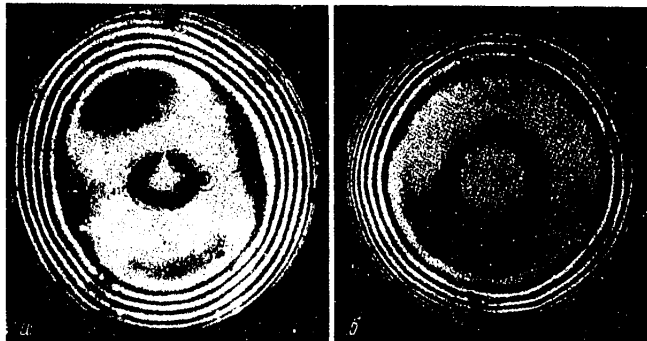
Interferograms of surfaces indicating correction of astigmatism using the CAOS/XY machine.
